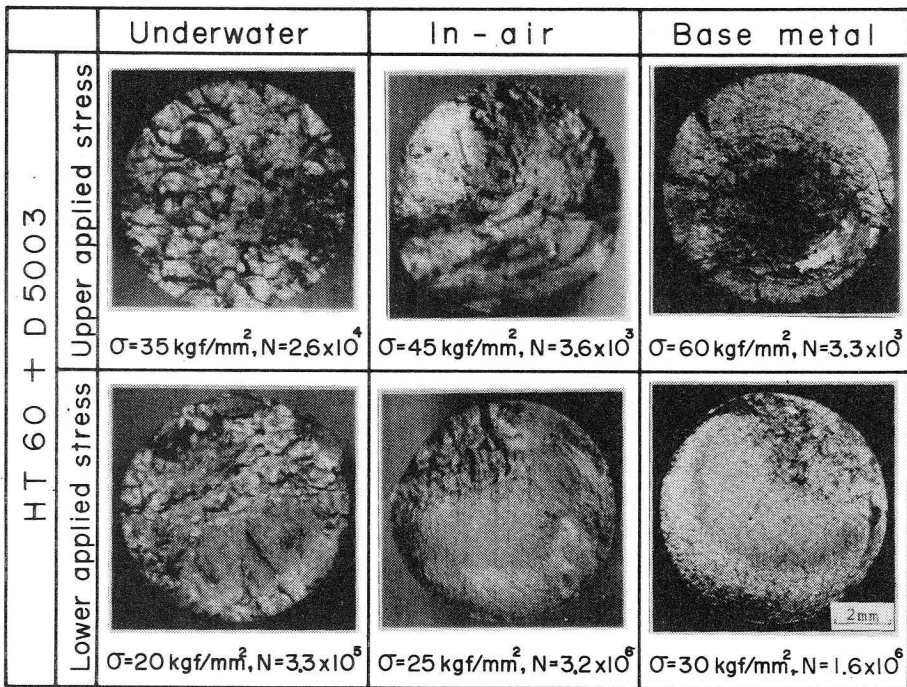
Macrographs of fatigue fracture surface
